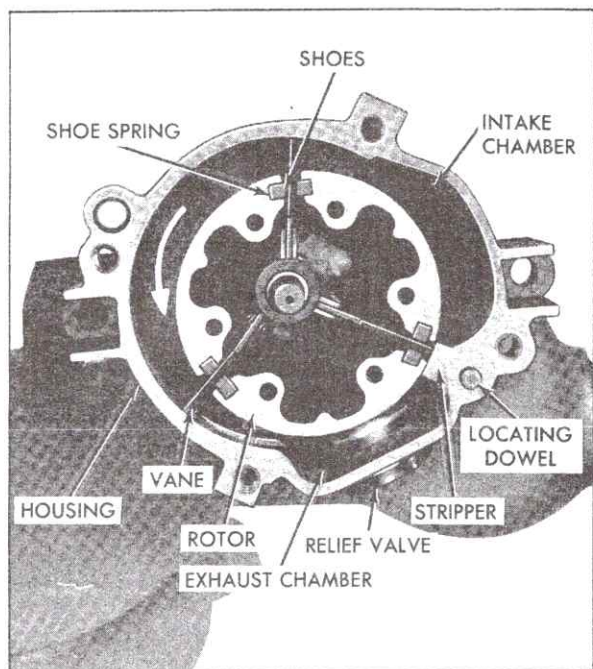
Rear of Pump, Cover Assembly Removed
